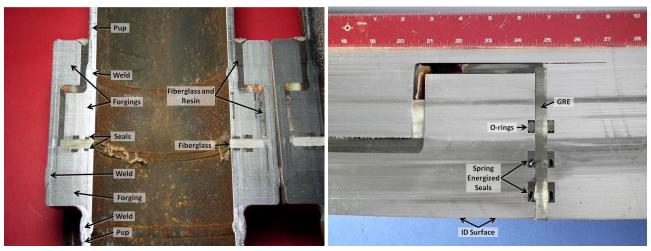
Left: dissected failed isolation joint (ref. /36/). Right: Close up view of a high pressure IJ after sectioning lengthwise showing six seals. The innermost two seals on each side are spring-energized seals. The outermost seals are O-rings. (courtesy Ref. /36/)
